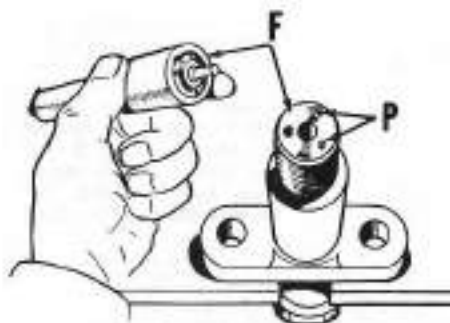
When reassembling nozzle and needle assembly in holder, be sure pressure faces (F) of nozzle and holder are clean, and that dowel pins (P) on holder enter proper holes in nozzle.
